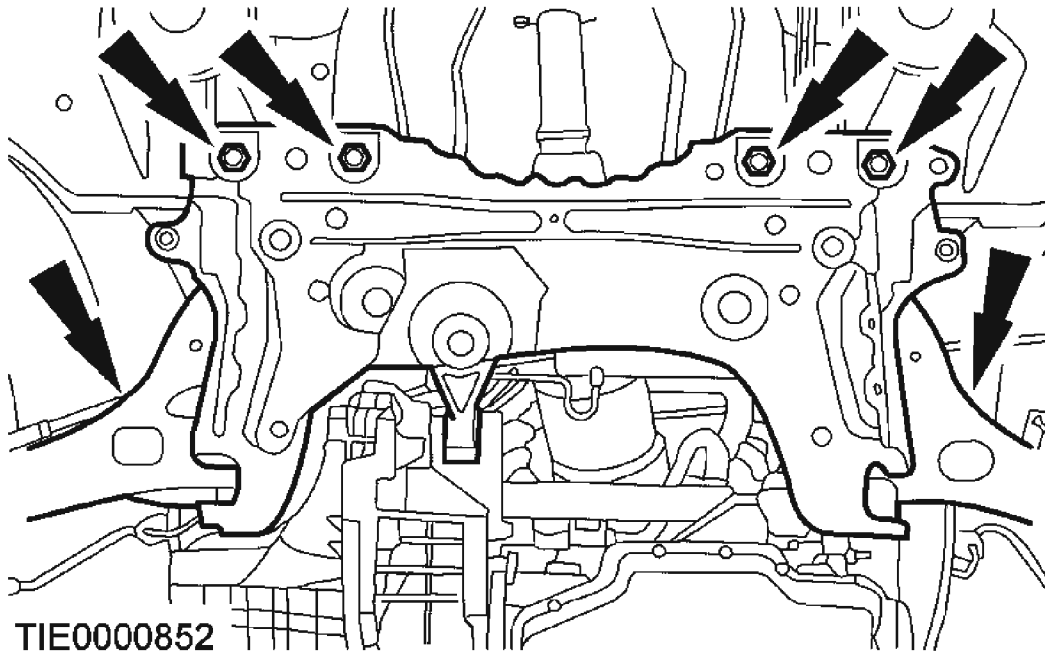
Tightening Stabilizer Bar Clamp Retaining Bolts
